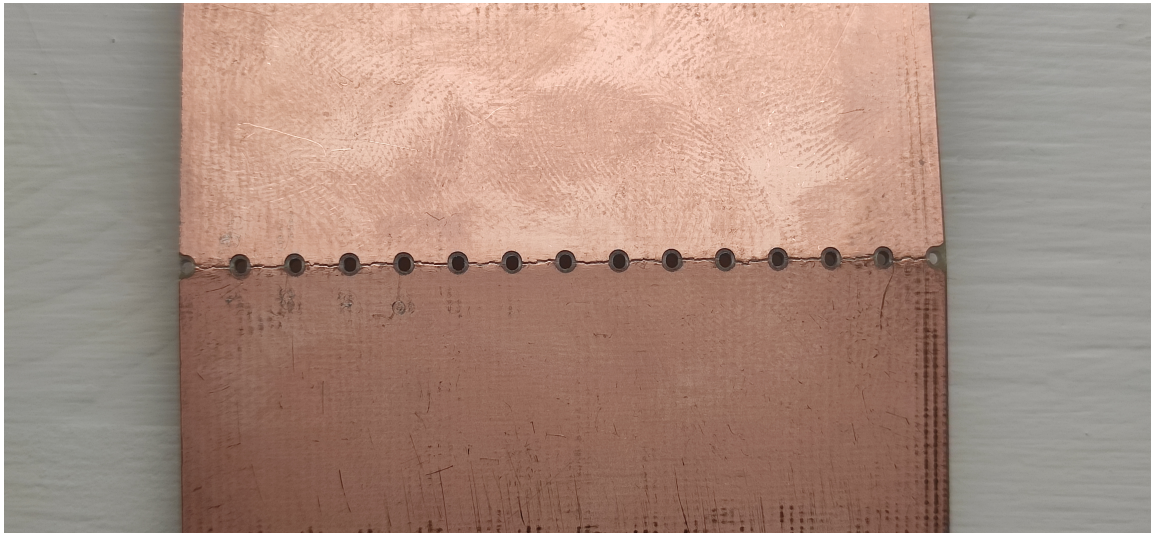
Bottom side of the mechanical test specimen "Eco1" after the three-point-bending test.
